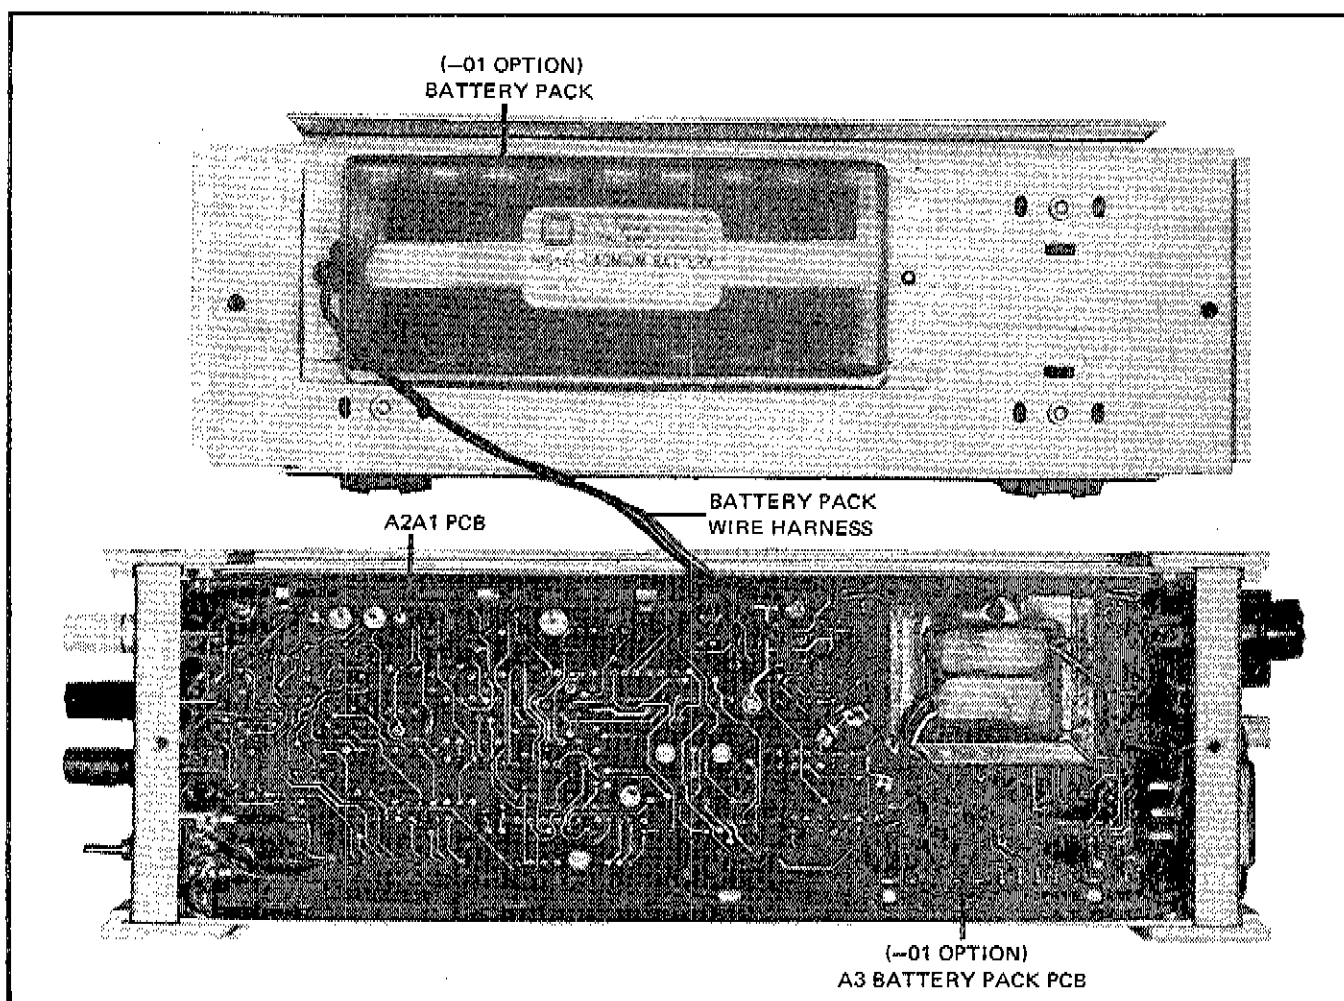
ASSEMBLY LOCATIONS (BOTTOM COVER REMOVED)
